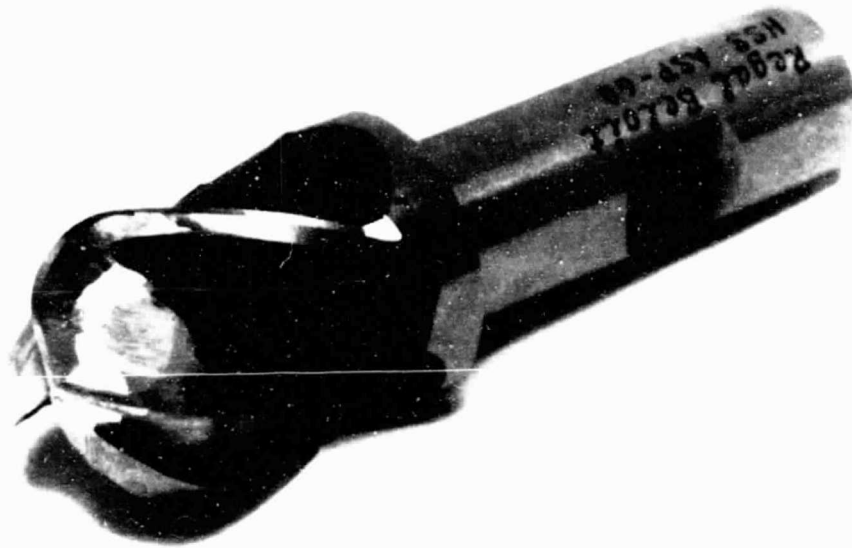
1.25-in. diameter, 0.375-in. corner radiused end mill selected as finishing cutter.
